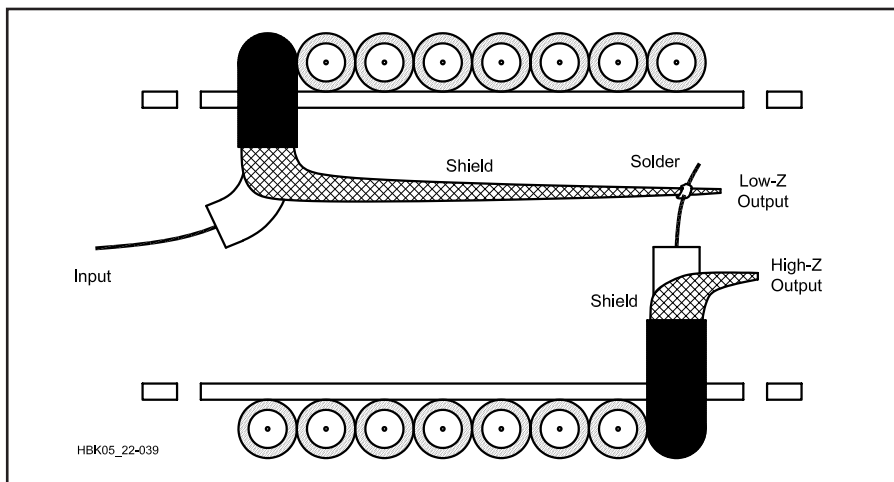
Construction details of the W8NX coaxial-cable trap.
